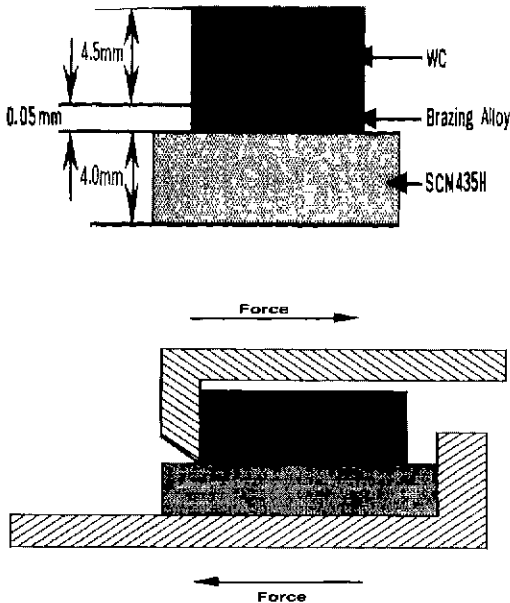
Schematic picture of jig and specimen for shearing strength test.
